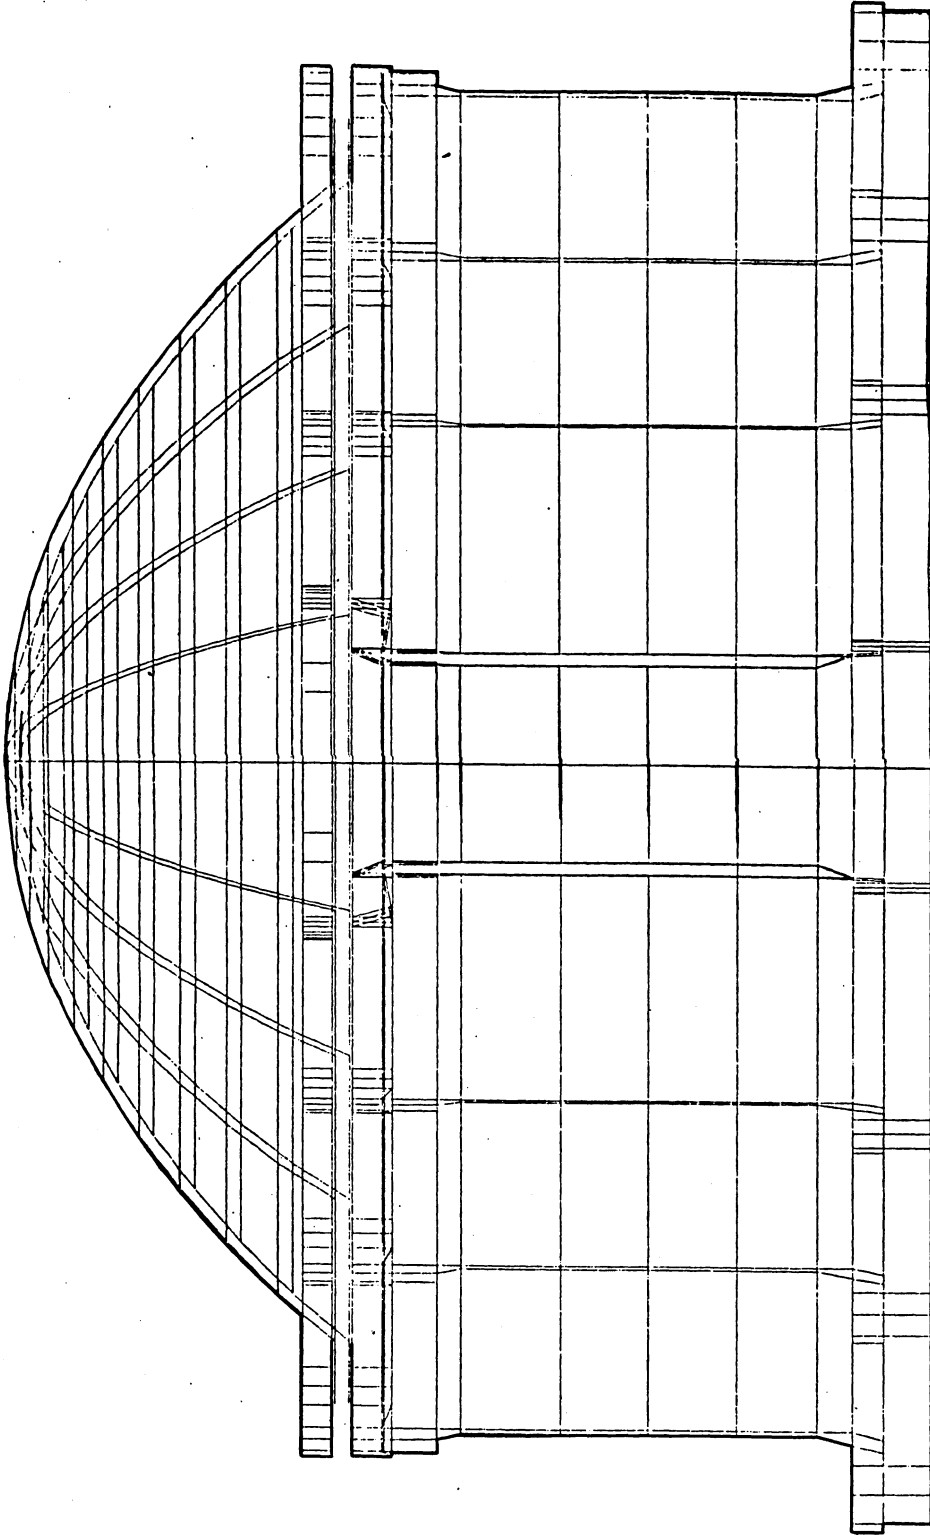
30° sectional model of ion-accelerator grid assembly for EASE 2 analysis (side view).
